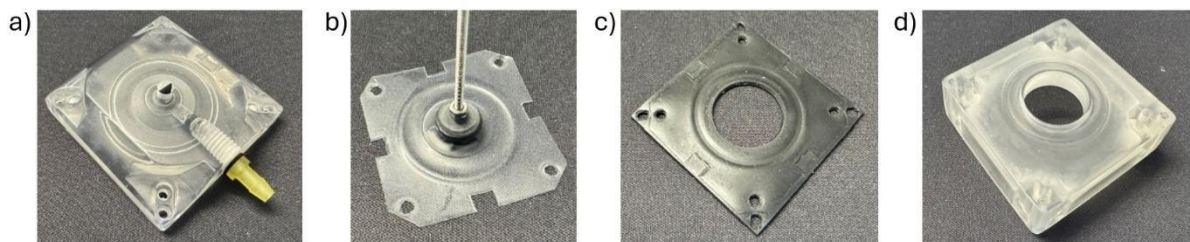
Pump chamber components: a) the upper housing half with valves, b) the FEP pump membrane, c) the silicone gasket, and d) the lower housing half.
